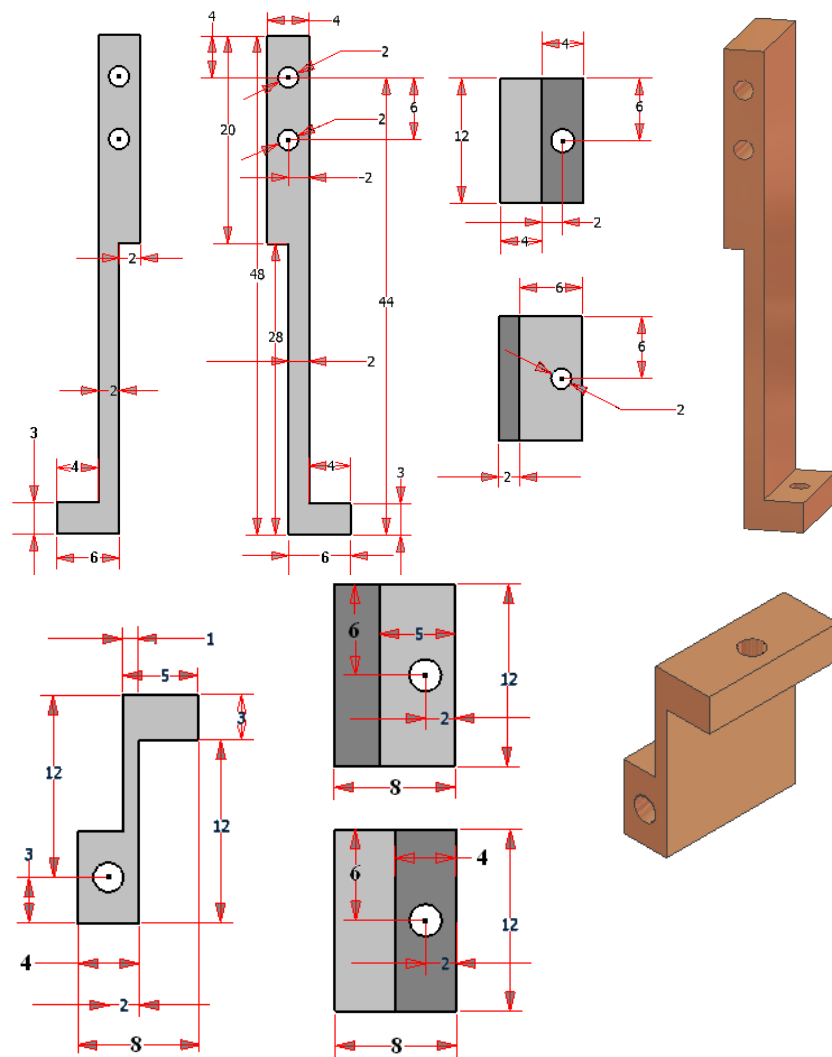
Inventor 11.0 technical drawings for the base pedestals and upper supports. These components were made of oxygen-free copper. All dimensions in millimeters.
